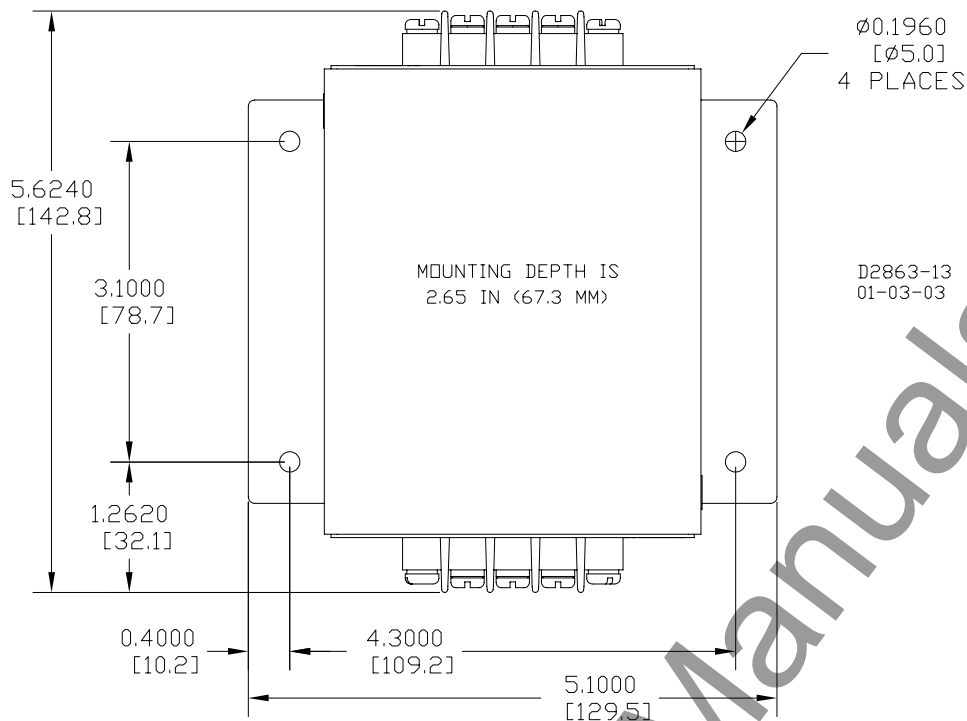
Mounting and Drilling Dimensions for CT Diagnostic Test Source Assembly
